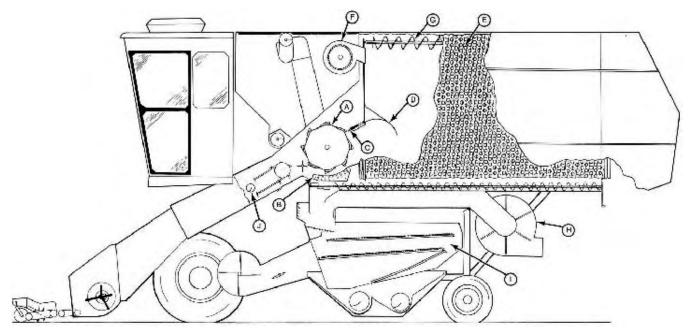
Western Roto Thresh: (A) Cylinder (B) Concave (C) Stripper Bar (D) De ector (E) Separating Drum (F) Separating Drum Fan (G) Stripper Auger (H) Aspirator (I) Shoe (J) Tailings Return.
